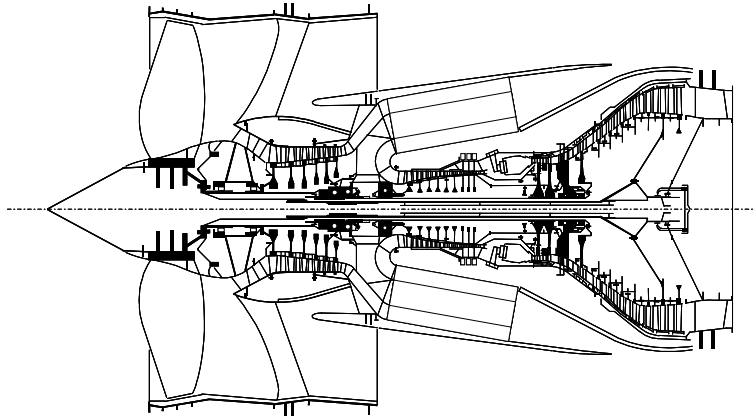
Typical Intercooled 3-Shaft Engine with Direct Drive Fan
